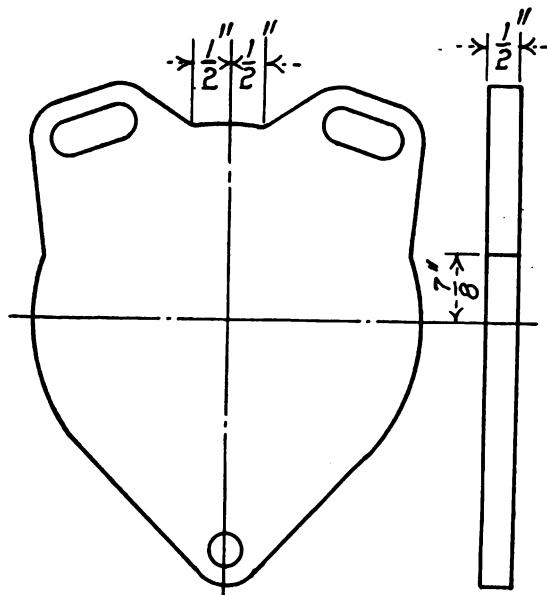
PROPOSED ADDITIONAL DIMENSIONS FOR GENERATOR FLANGE MOUNTINGS
